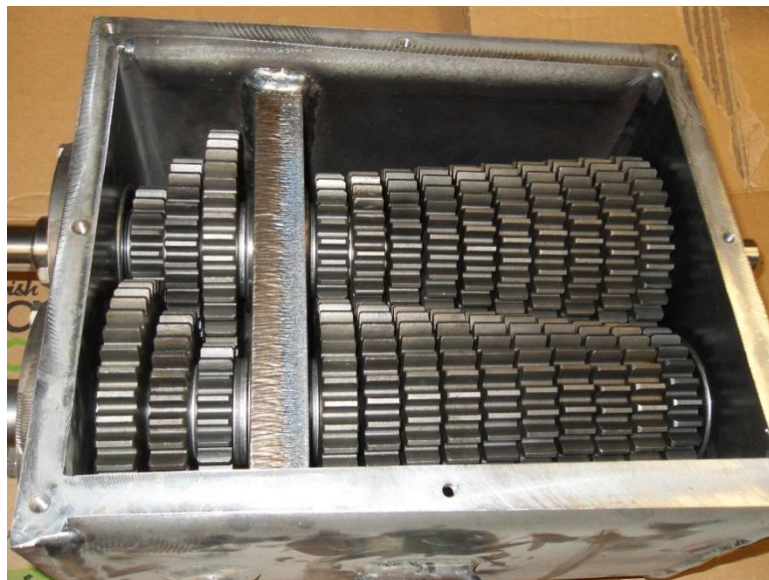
Current Design of Gearbox Housing and Interior [3]
